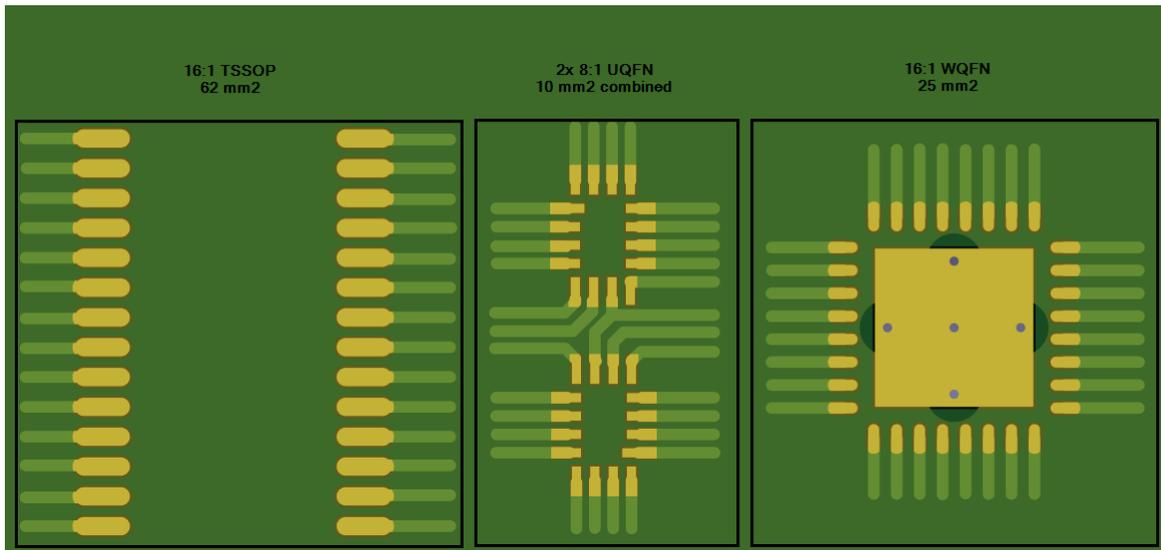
PCB Space Savings Using Two 8:1 Devices Instead of One 16:1 Device
